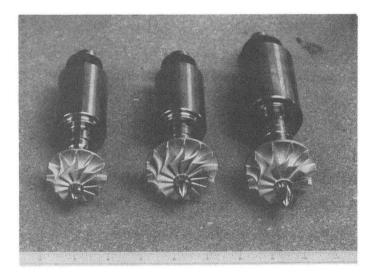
(CBB 831-463). The three CHL Sulzer oil bearing turbine shafts and wheels. Work energy is removed in the oil friction and heating. Photo courtesy FNAL.
